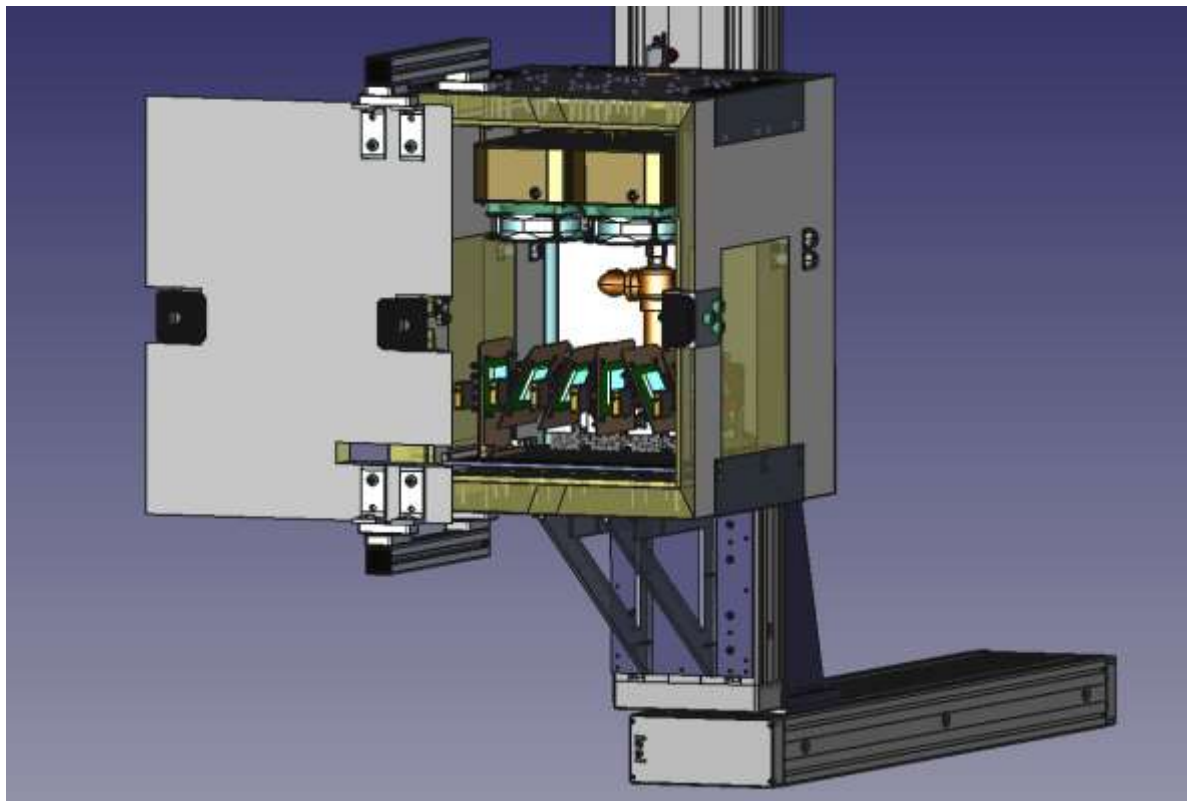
Figure A: Final version of the cold box design integrated in the test-beam environment on the X-Y stage. The cooling and experimental assemblies are visible through the parallel opening front door.
